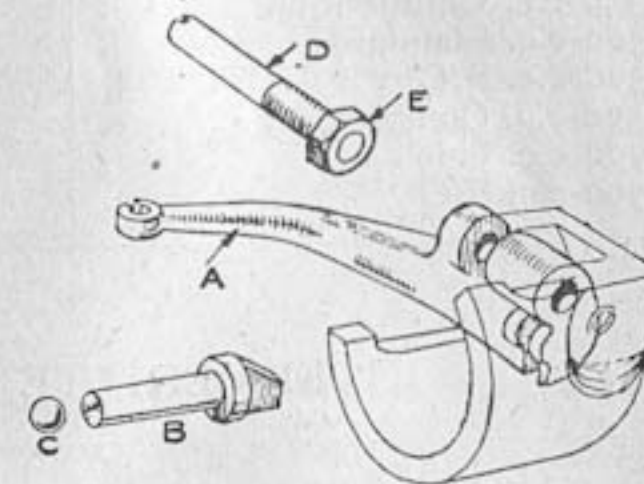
CLUTCH-OPERATING MECHANISM USED ON H.P.-TYPE GEARBOX. (A) Operating lever for clutch. (B) Short push-rod. (C) Steel ball. (D) Hinge pin. (E) Lock-nut for pin.
